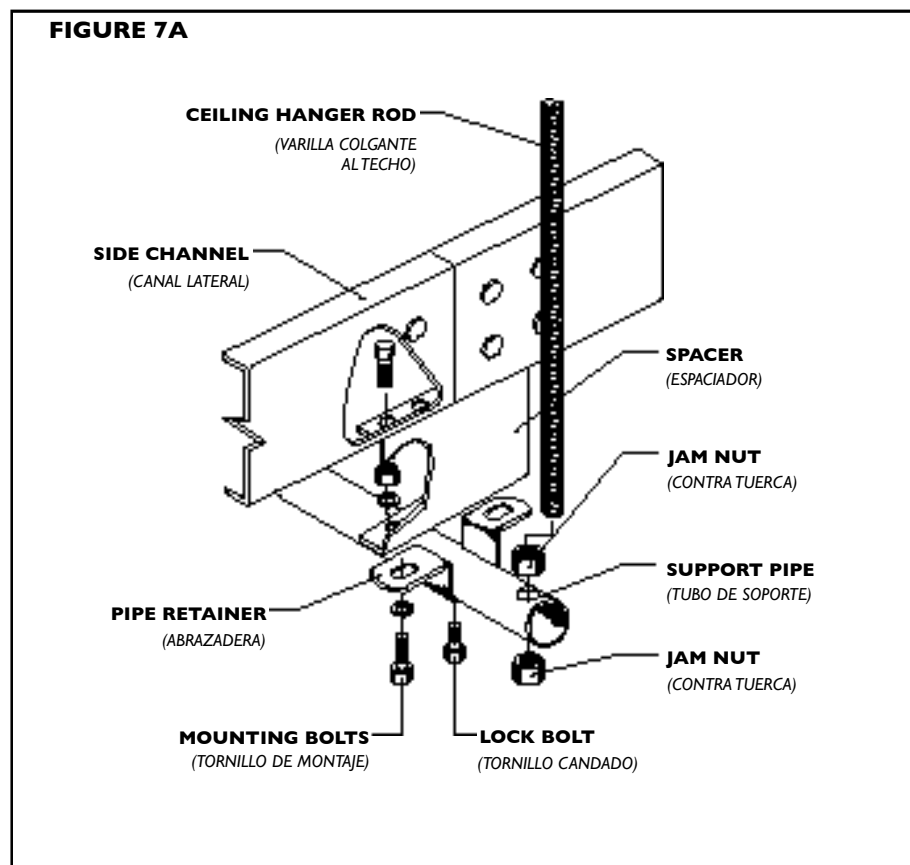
A shows how a ceiling hanger mounts to a conveyor section. Ceiling hangers should be mounted at section joints. For safety information concerning conveyors mounted overhead, refer to “[Installation Safety Precautions](#)” on Page 5.
